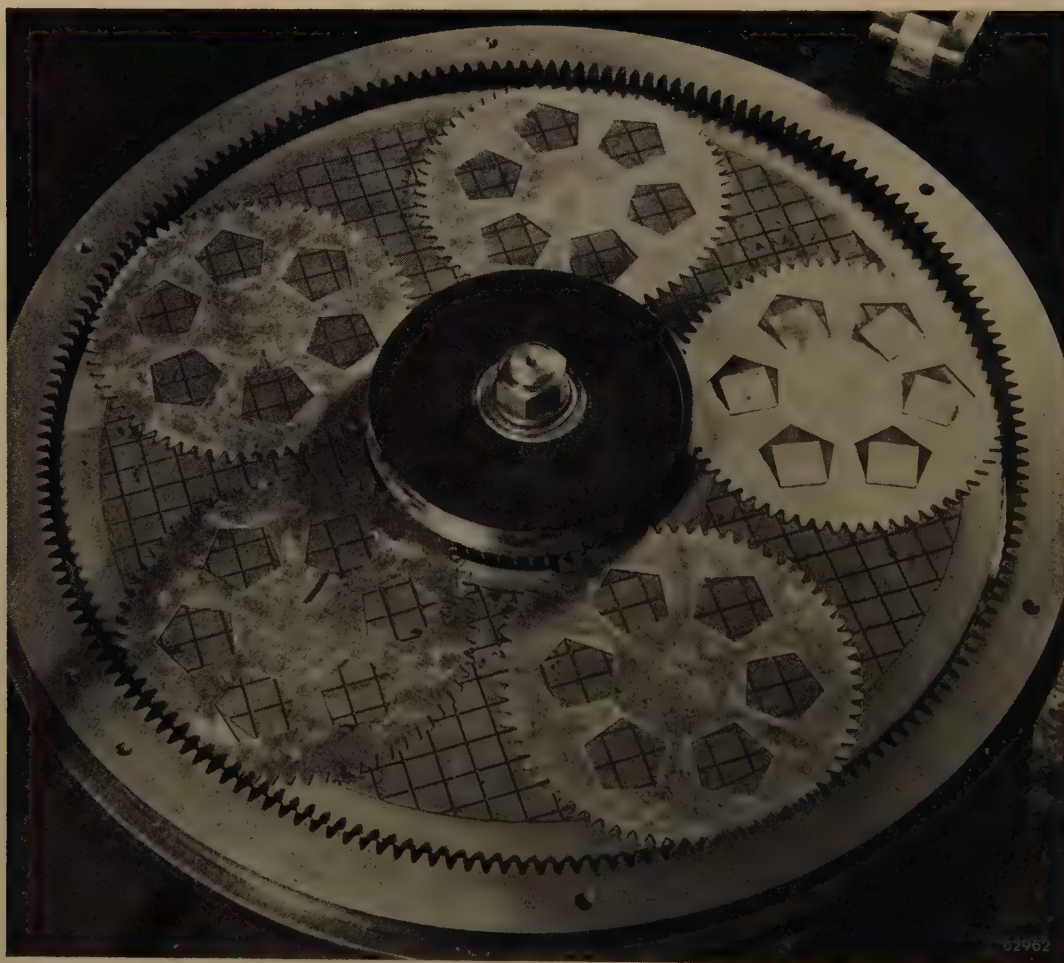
The planetary lap machine. The serrated lap plate is stationary, the outer ring gear and inner gear rotate. The five gear-shaped work holders, each of which can hold six quartz blanks for lapping in the pentagonal holes (only one of the holders is filled) describe a complex motion over the plate. A second lap plate is laid on top of the arrangement so that the thirty blanks are lapped on both sides simultaneously. For smaller oscillator-plates holders with 8 and 11 holes are used, so that a lap then consists of 40 or 55 plates, respectively.
